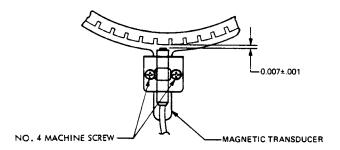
Lower Transducer Alignment, Front and Top Load
